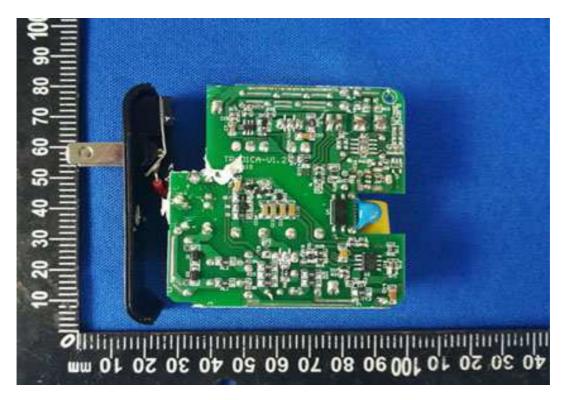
PCB tracess view: TA06A3 and TA07E3
